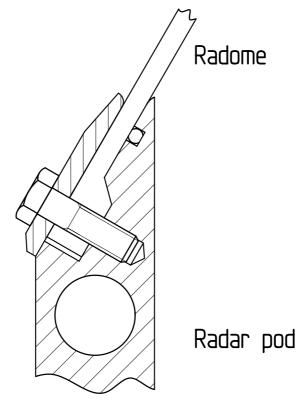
Wedge-shaped mounting interface with clamping strip.
